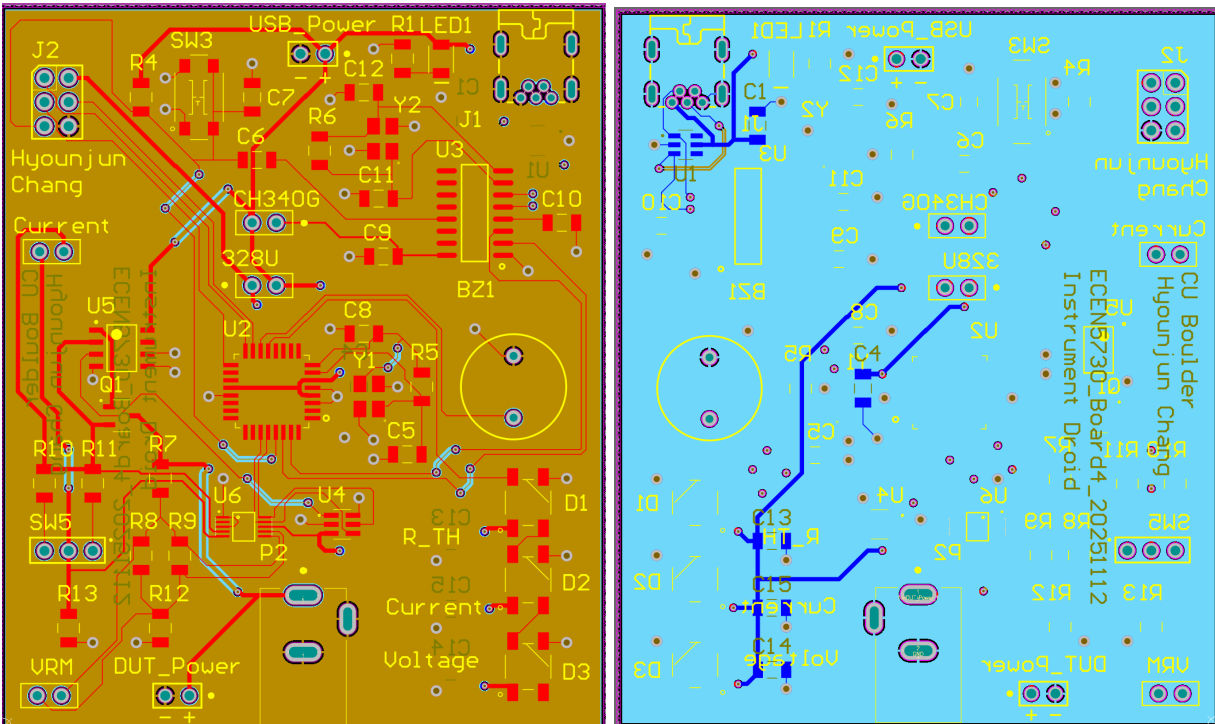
PCB Design on Altium Designer 2D Front View (Left), 2D Back View (right)
